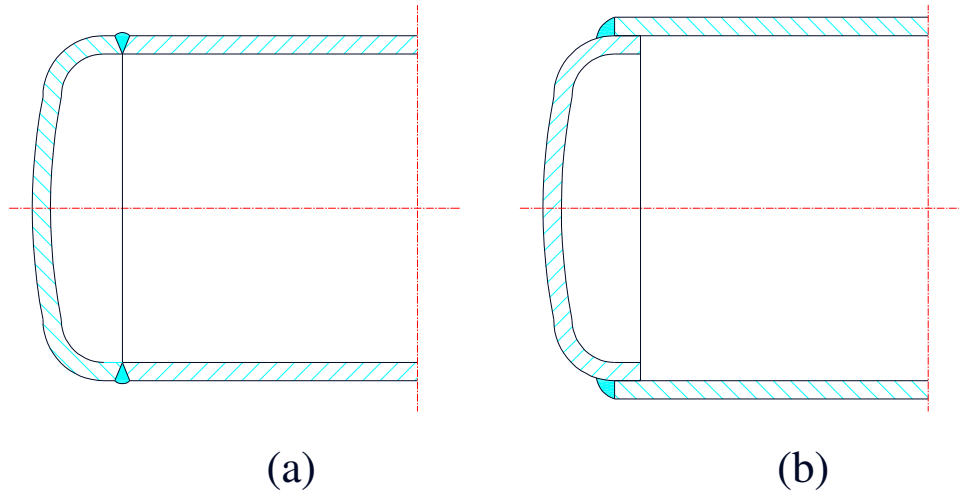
Convex tank heads. a. Weld in tension. b. Weld in shear
